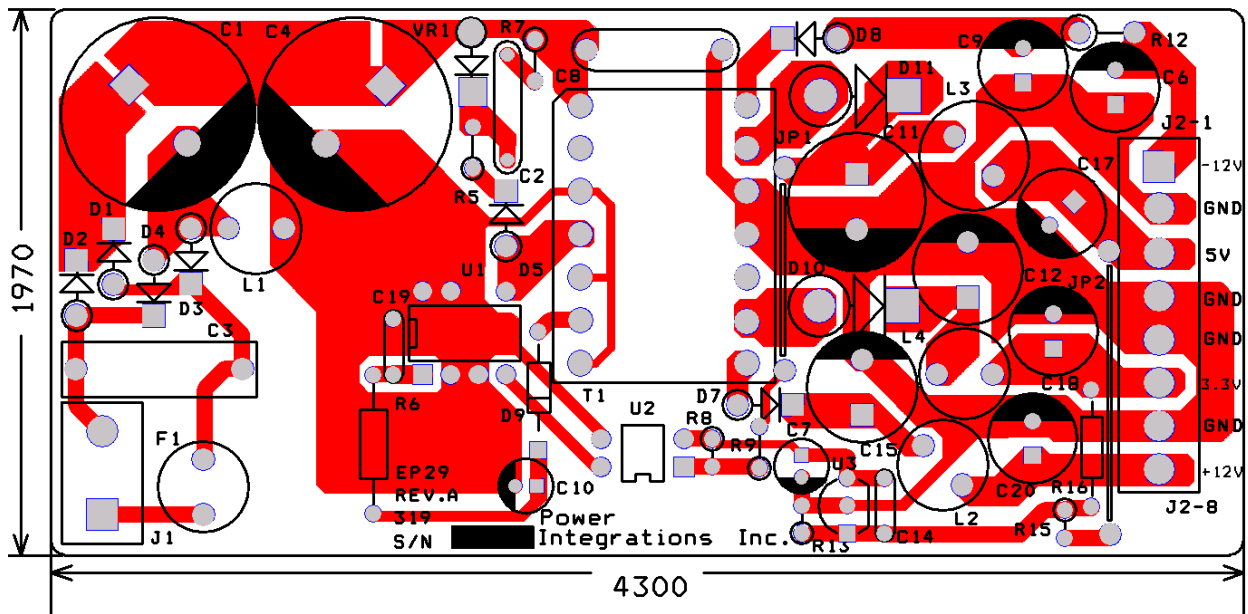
Printed Circuit Layout (Dimensions 0.001”).
